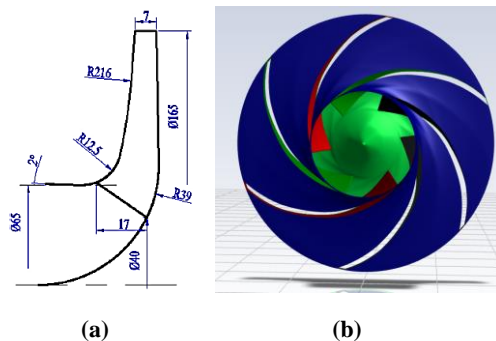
2D views of a) the impeller blade (Fu *et al.* 2015), and b) the whole impeller.
